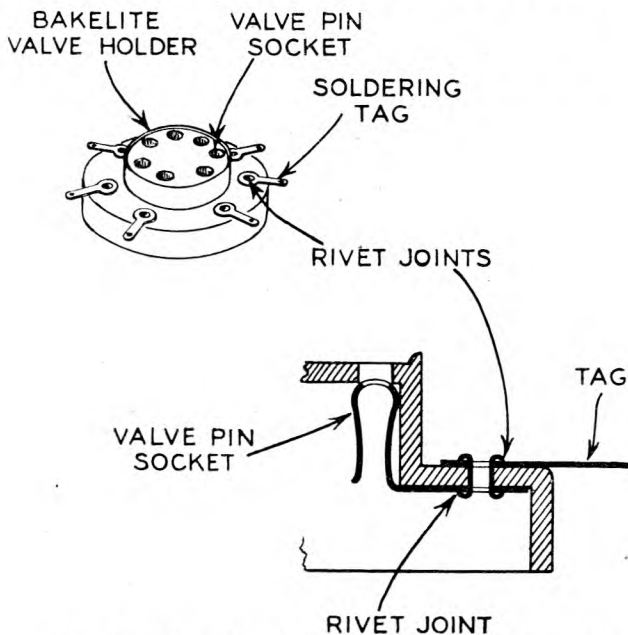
VALVE HOLDER No. 18, SHOWING UNNECESSARY RIVETED JOINTS.
